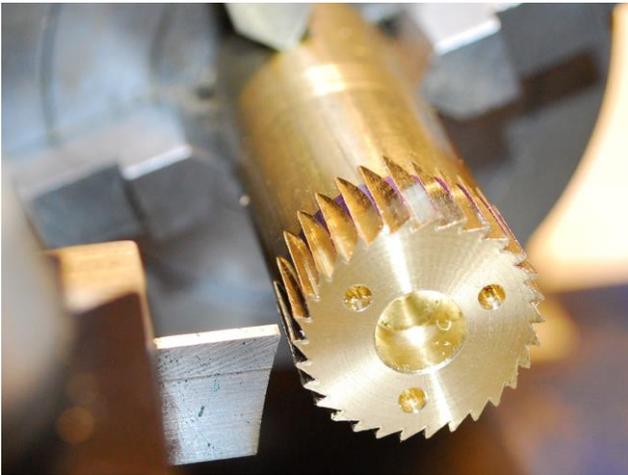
The fusee ratchet ready to be parted from the end of the brass rod.
